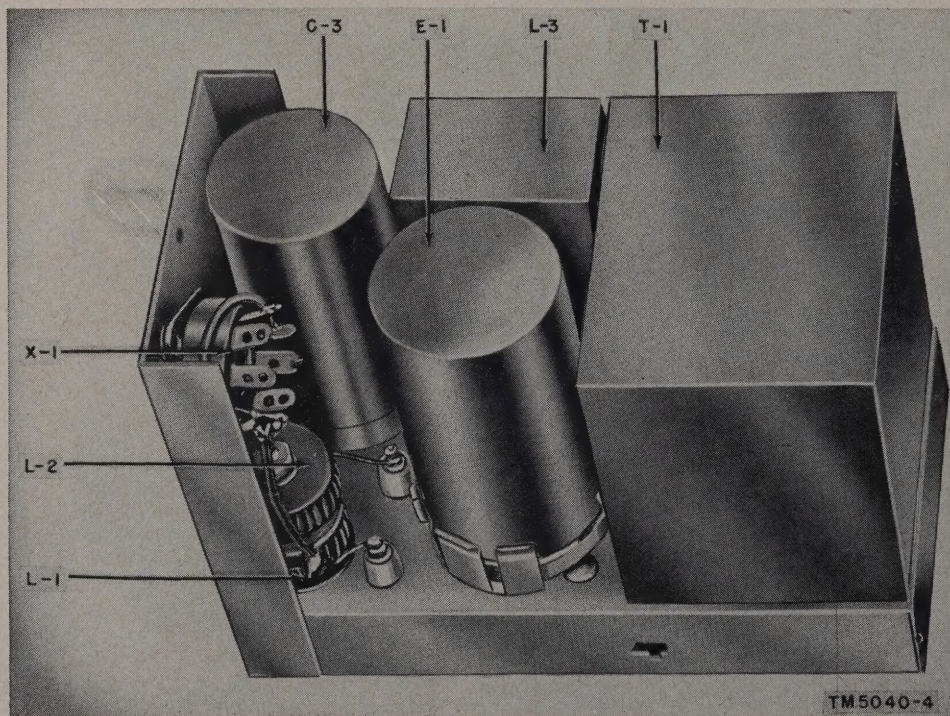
Power Supply PP-282/GRC, top view of chassis.
